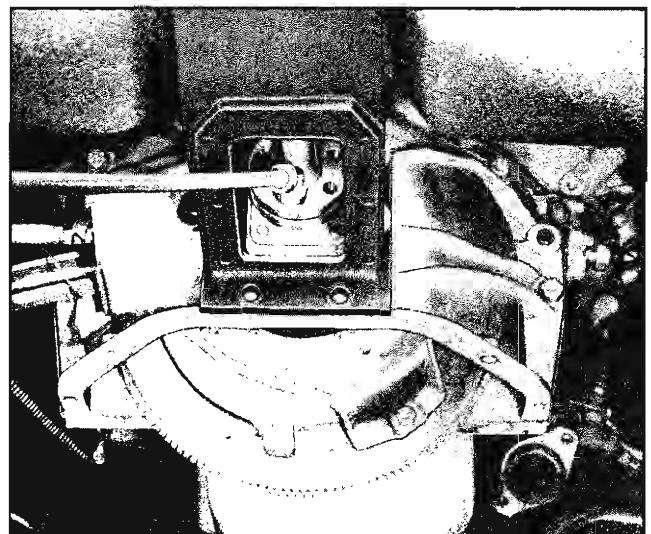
Removing Bolts from Propeller Shaft Flange
